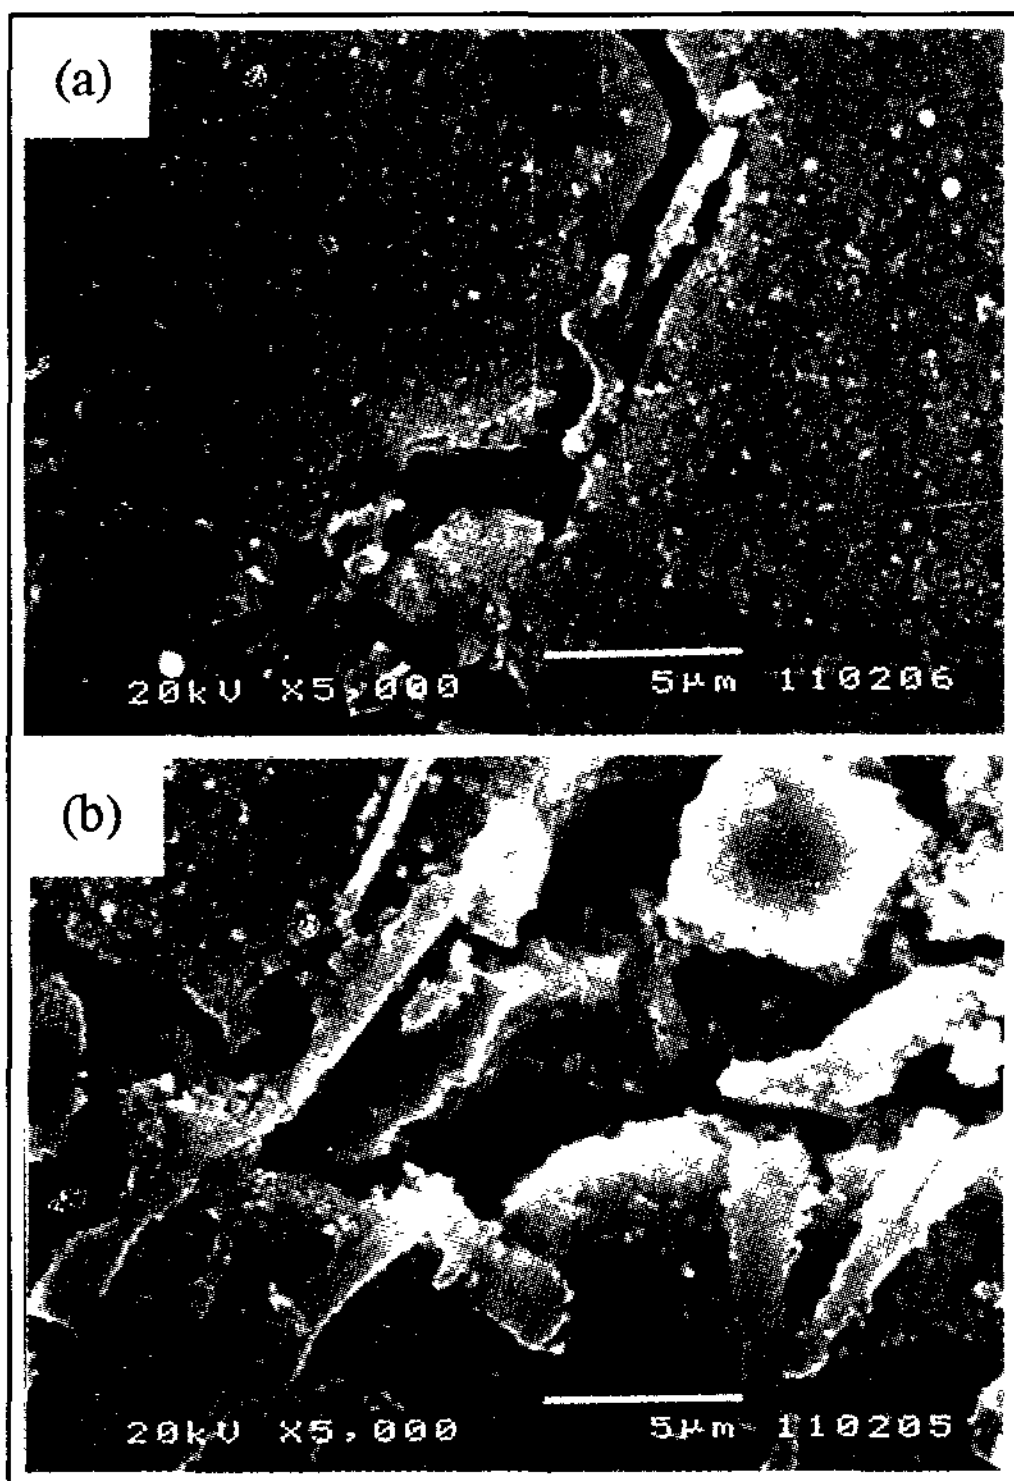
Fractographs in direct under fatigue crack spot various specimens after fatigue test (a) A 580°C (b) A605°C
